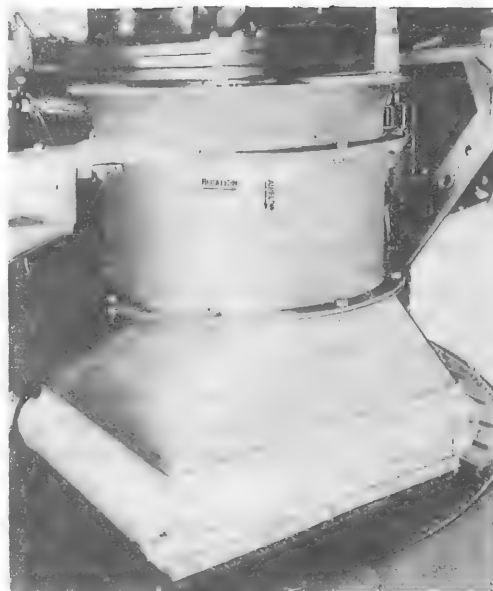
Main Gear Box Oil Cooler and Blower Installed
